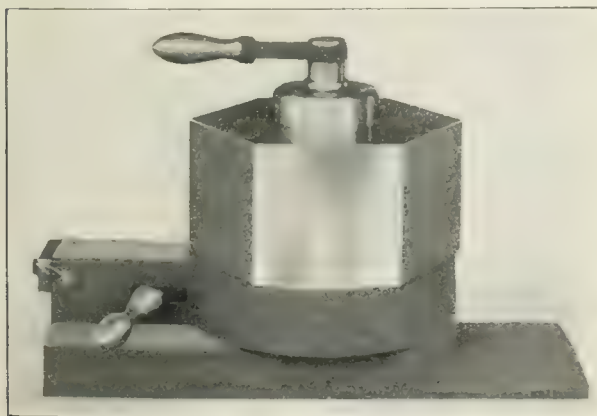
The Latest Type of Morris Engine Lathe Turret.
